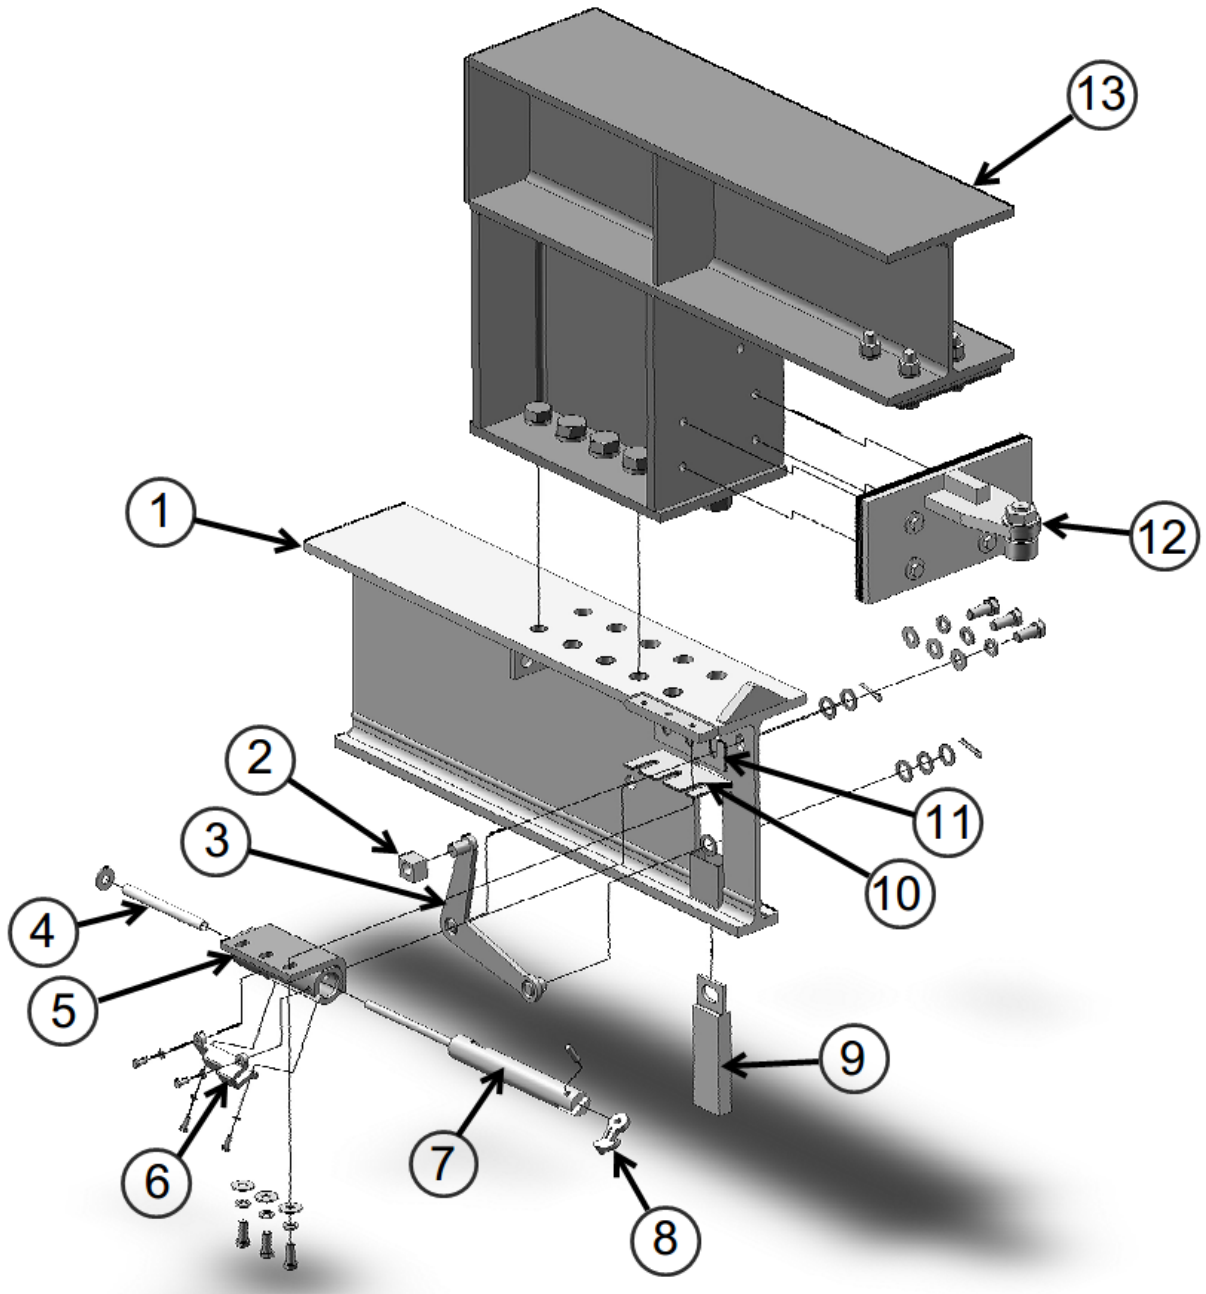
a typical rail prep for interlock with step cut. If a spur rail or crane bridge is deeper than 14" or 16", it must be "step cut" or "notched" to either 14" or 16", as shown in this typical example.
